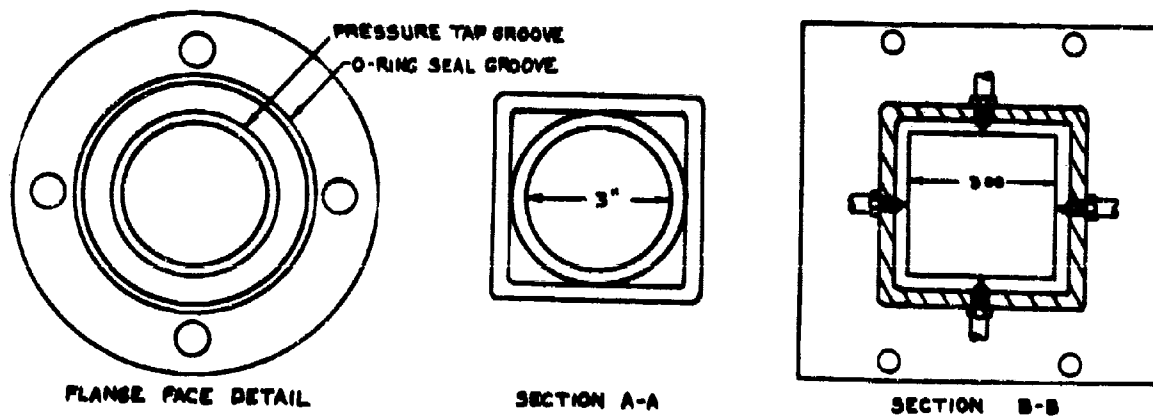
DETAIL LAYOUT OF TRANSITION SECTION ( $\frac{1}{8}$  SCALE)
